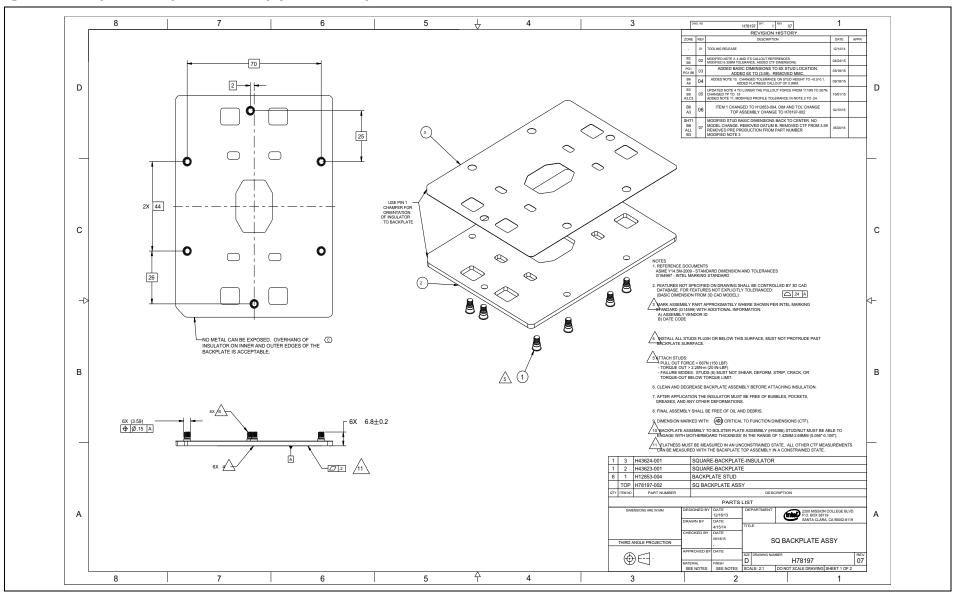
Square Backplate Assembly (Sheet 2 of 2)
